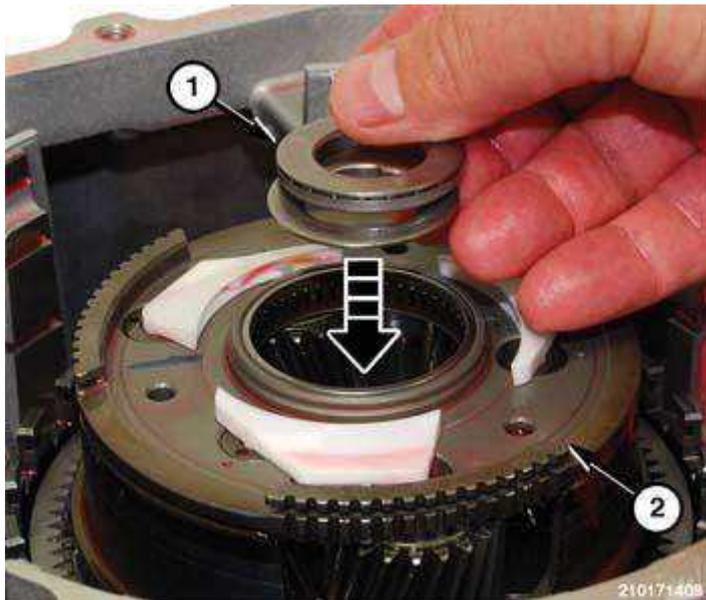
Thrust Bearing, Race Set & Middle/Rear Planetary Gear Assembly
